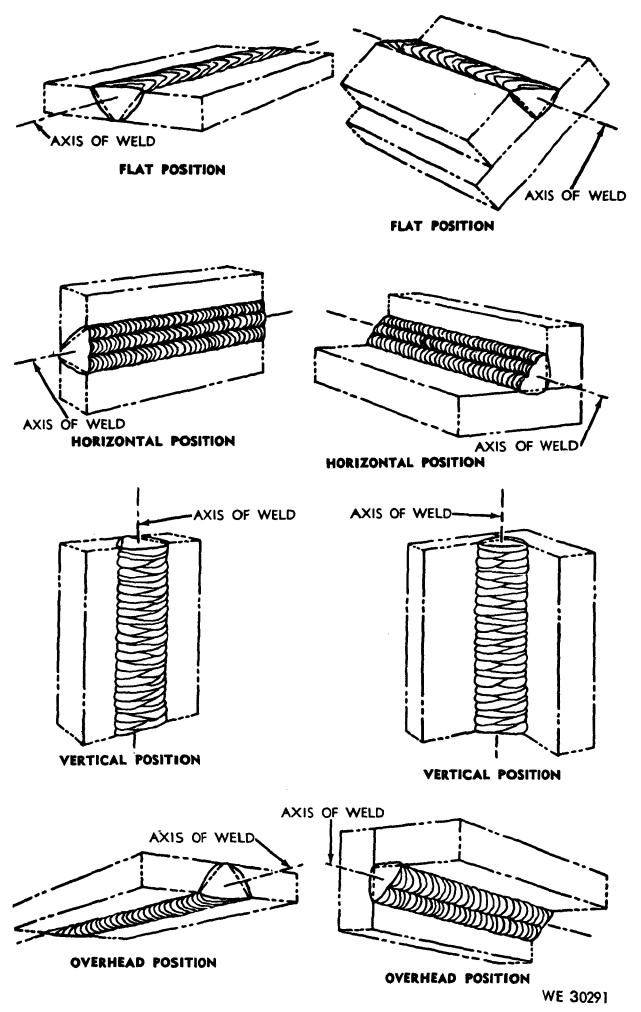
Positions of welding for groove and fillet welds.
